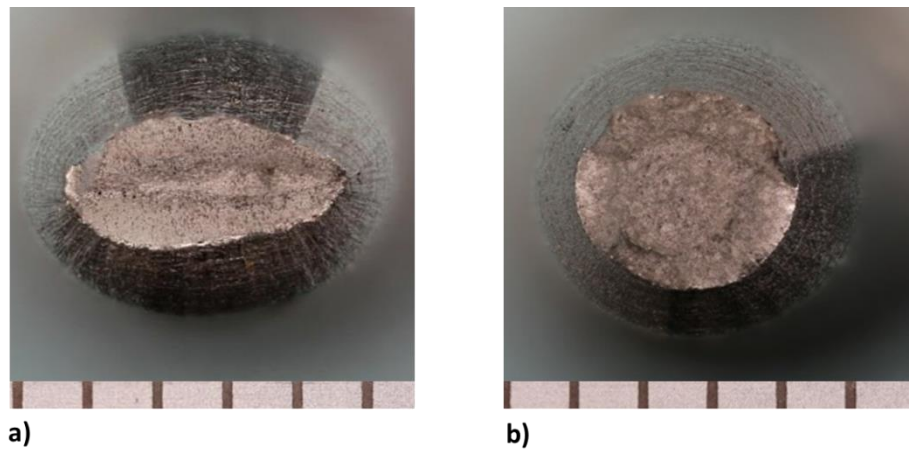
Macrographs of the fracture faces of the tensile specimen, a) M1OD and b) M2, tested at room temperature.
